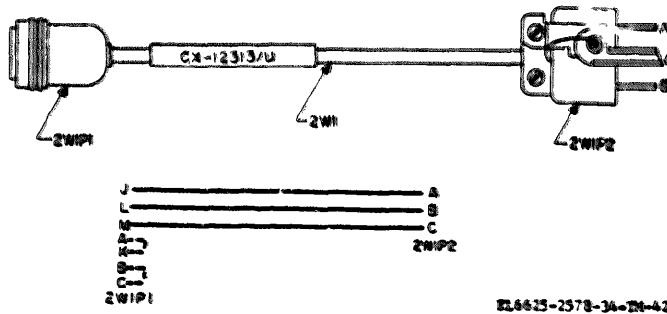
Power Supply AC Cable Assembly CX-12313/U.
